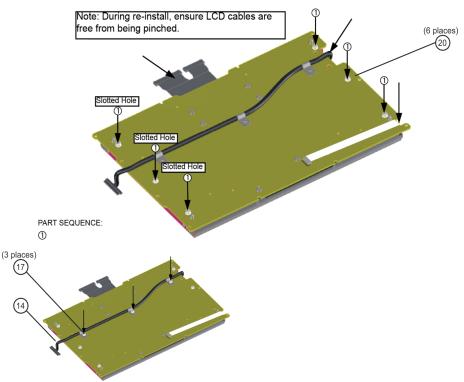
Removing the Flat Flex Cable from the LCD to the Controller Board
